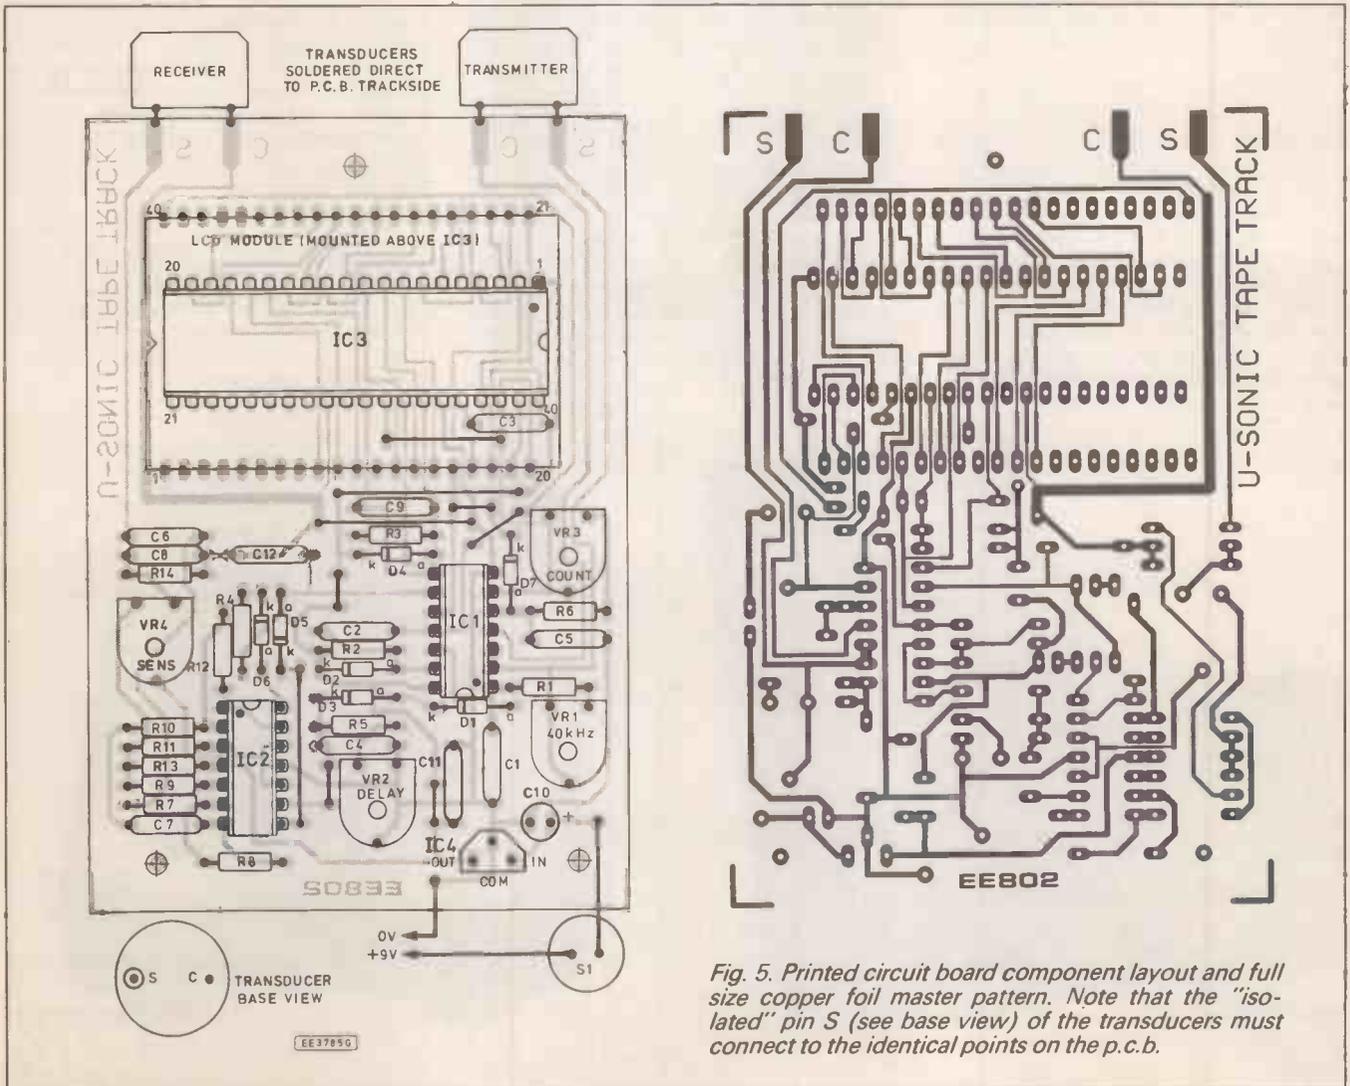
Printed circuit board component layout and full size copper foil master pattern. Note that the "isolated" pin S (see base view) of the transducers must connect to the identical points on the p.c.b.
